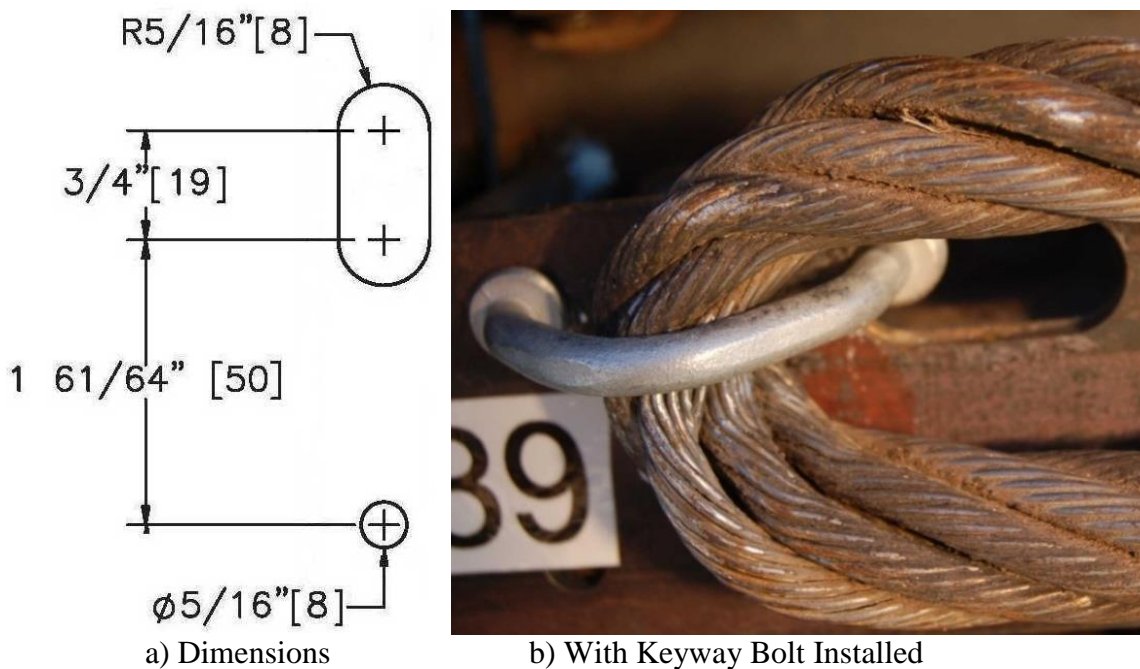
Small Oversized Keyway—(a) Dimensions and (b) With Keyway Bolt Installed
